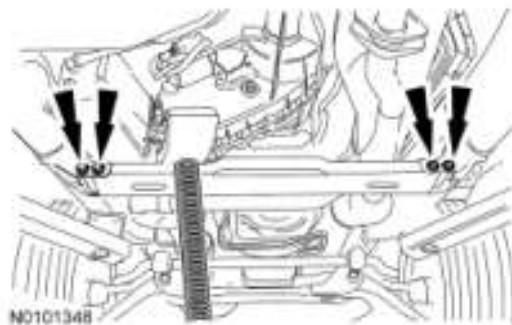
Locating Transmission Fluid Cooler Tube Bracket Bolt
